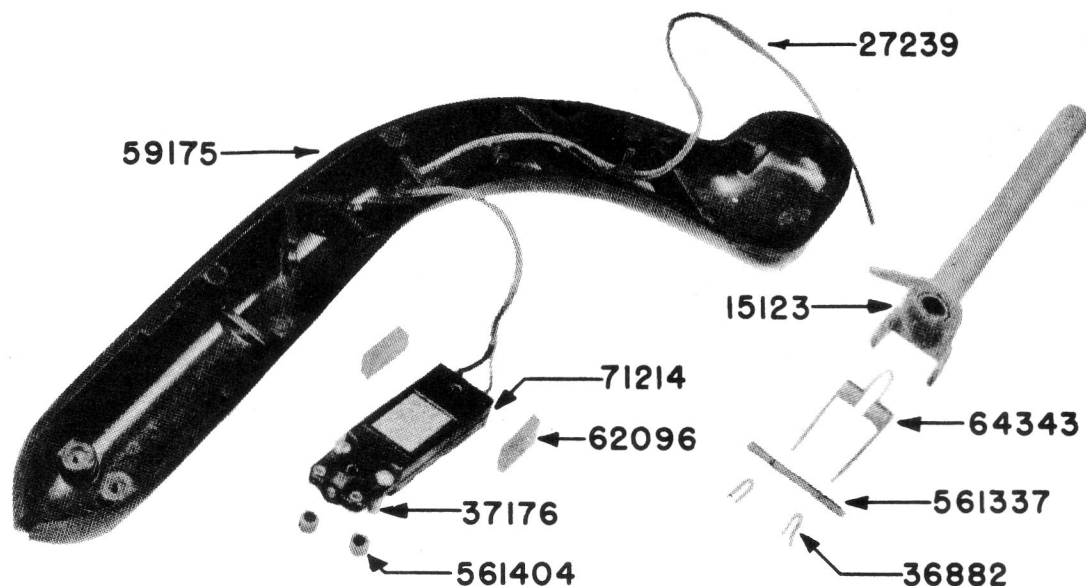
TONE ARM ASSEMBLY No. 13434
